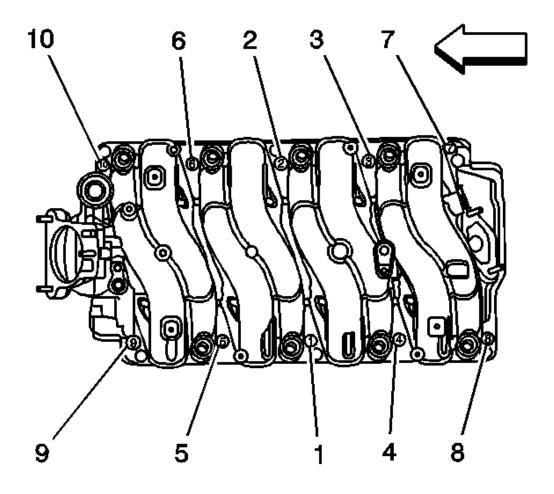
View Of Intake Manifold Courtesy of GENERAL MOTORS CORP.
